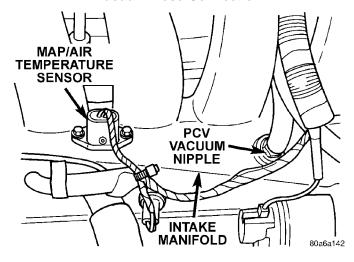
Intake Manifold Electrical and Vacuum Hose Connections
